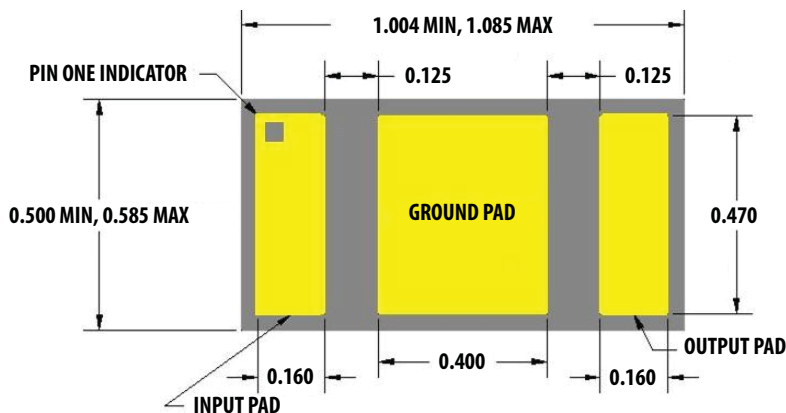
Solderable area of the device shown in yellow. Dimensions in mm.
